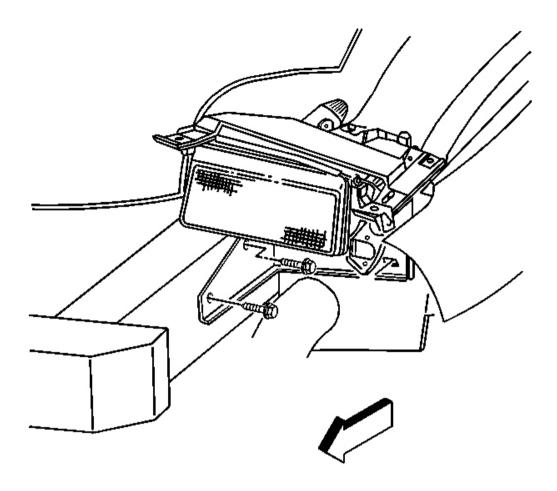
Headlamp Bracket To Frame Rail Bolts Courtesy of GENERAL MOTORS CORP.
